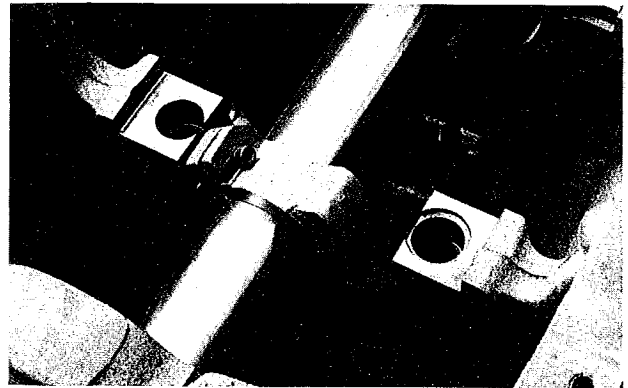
BORING SADDLE 0.100" OVERSIZE
